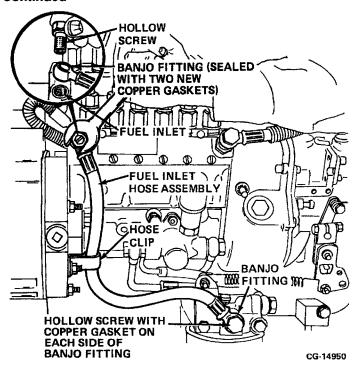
Installing the Fuel Inlet Hose Assembly
